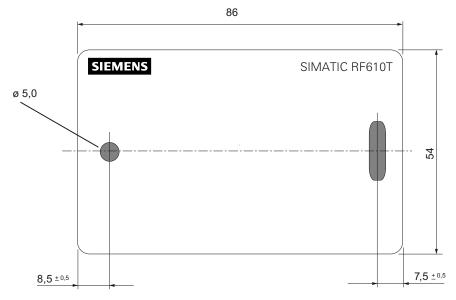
Dimension drawing SIMATIC RF610T (special variant ATEX)
